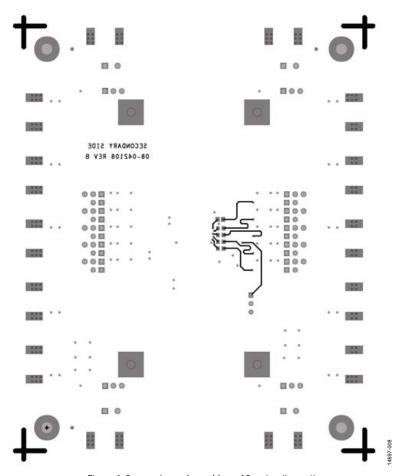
Bottom Layer Assembly and Routing (Layer4)
